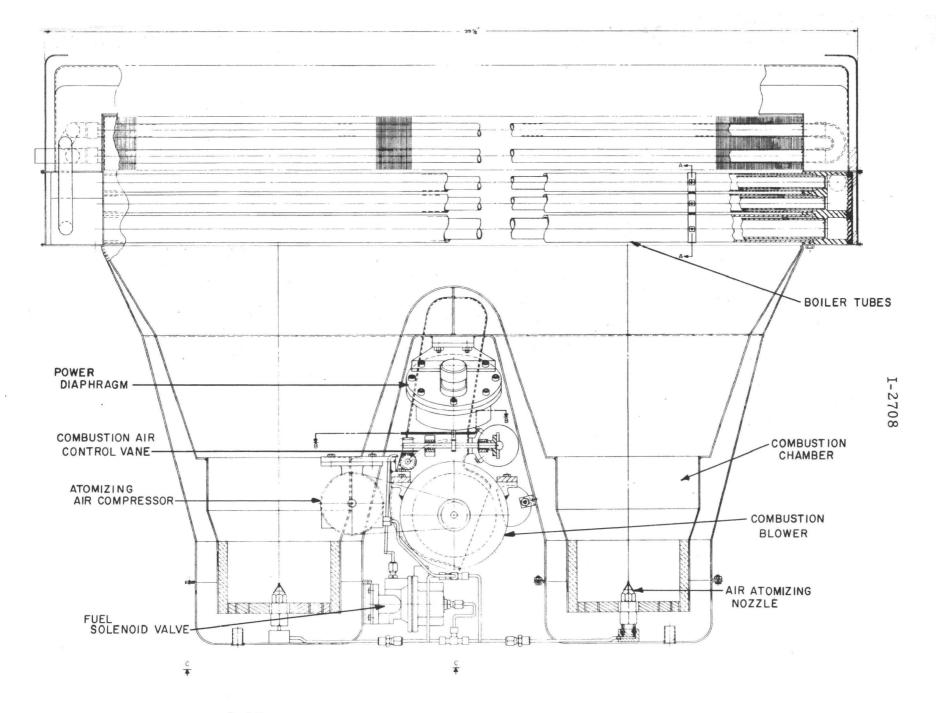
Front View of Combustion System-Boiler Subassembly.
